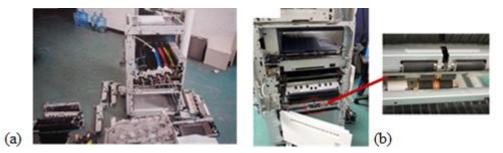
a) The disassembled individual parts of copier. b) One of the sensitive components in copiers.
